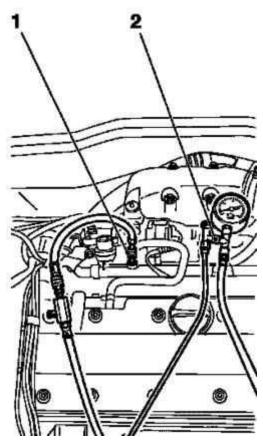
Reset the fuel pressure: 1 - Specials Tool 2 - Test the connection
